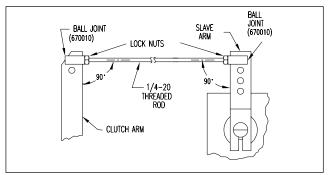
Proper Clutch Slave to Throttle Arm Installation
